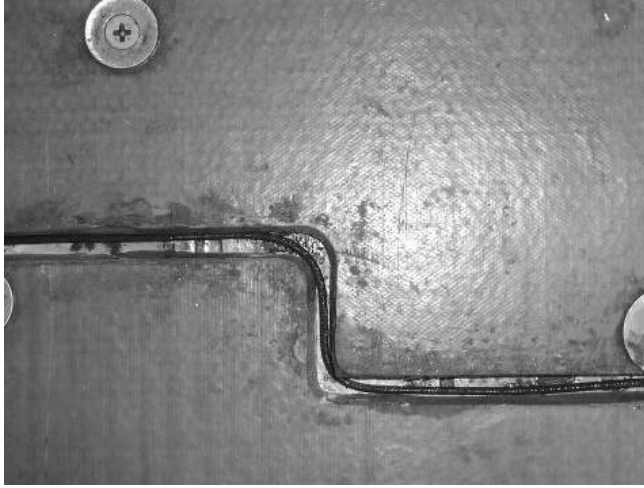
Percolation sensor installed between floor-panels in a Boeing B737.
